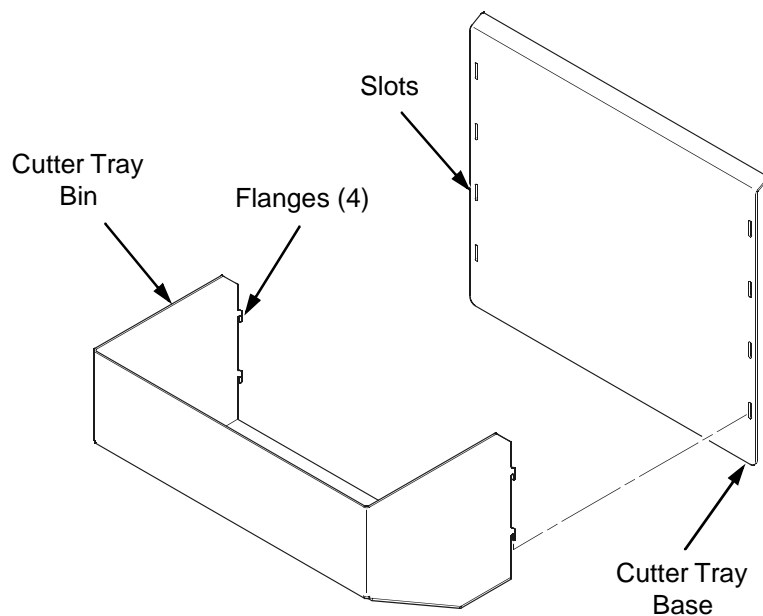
Attaching the Cutter Tray Bin to the Cutter Tray Base
